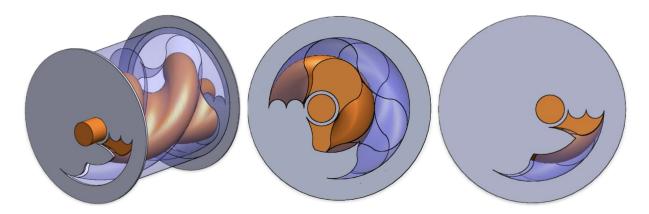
Internally geared screw machine model showing suction and discharge end port plates[3].
